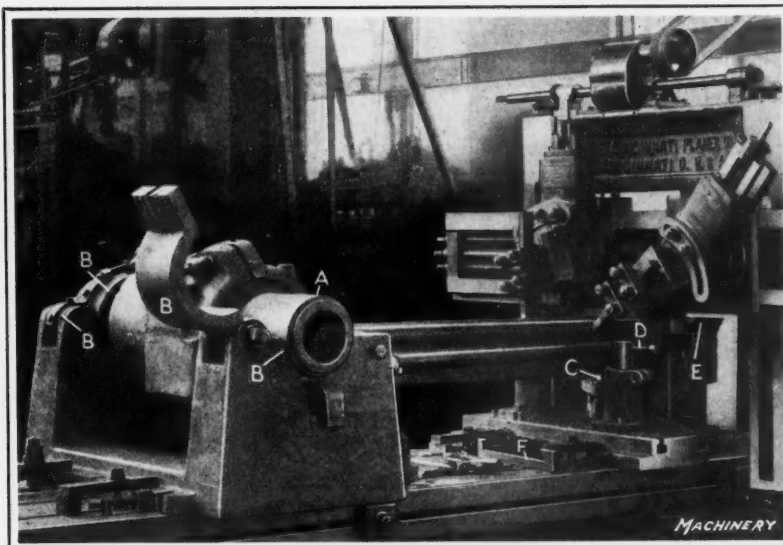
Fixture with Mandrel and Bearings for supporting Radial Drill Arm while planing the Dovetailed Bearing for the Drill Head
